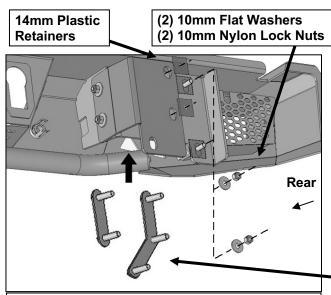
Insert factory bolt plate into and through Mounting Bracket on back of Bumper
